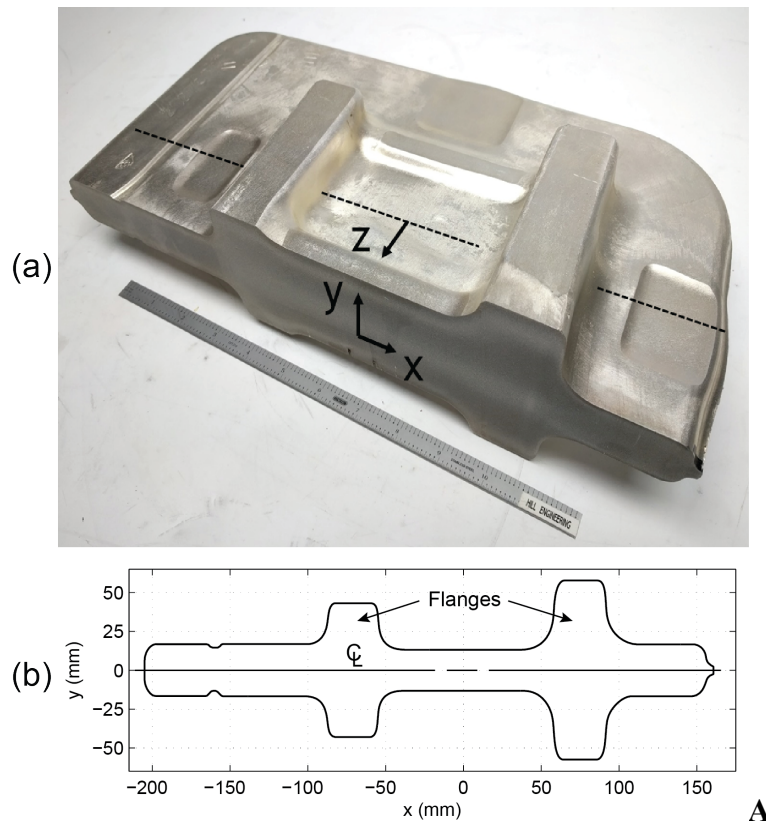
7085 aluminum forging specimen with dimensions of 375 mm (14.75 in) wide, 181 mm (7.125 in) tall, and 111 mm (4.375 in) thick. The measurement plane is 76 mm (3 in) from the prior cut face, at $z = 0$ (shown as a dashed line).
